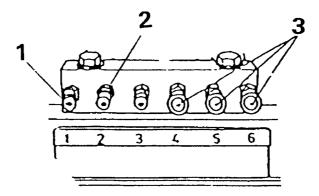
Diagnostic Center – Tow and Pressure Check Ports1. Check valve RB2. Check valve LB3. Caps
